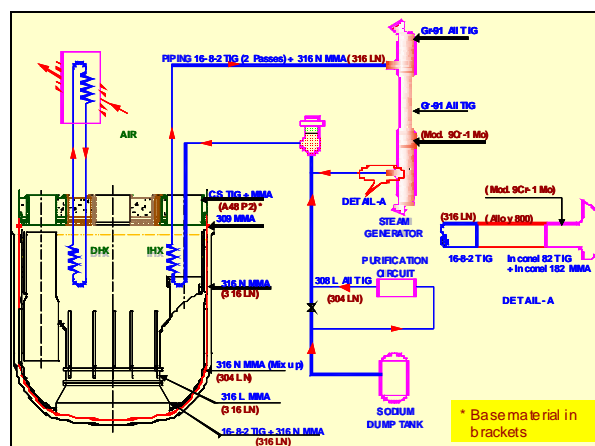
Welding consumables used in different components and piping of PFBR
